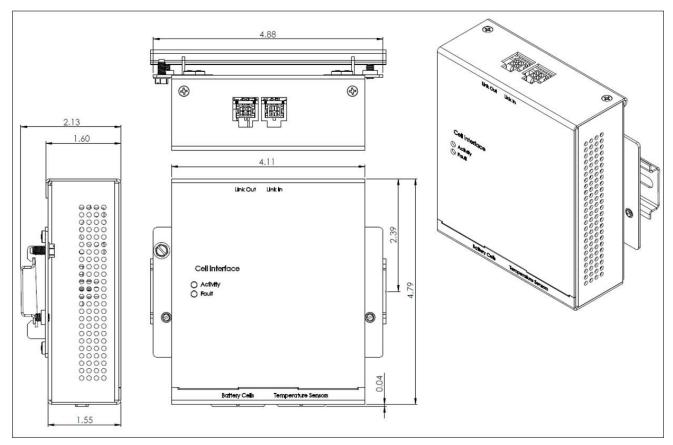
Mechanical Drawing of Cell Interface with DIN Enclosure (NRND)
